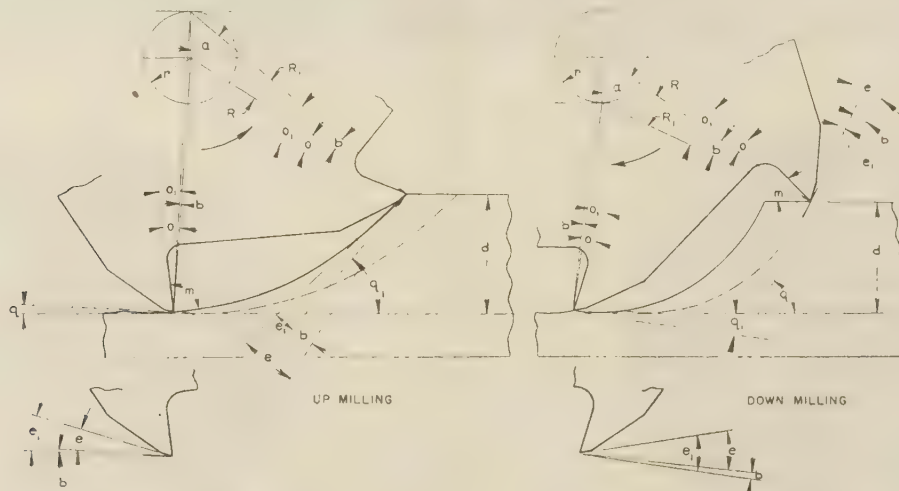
ANGLE OF APPROACH, RAKE AND CLEARANCE ANGLES IN UP MILLING AND DOWN MILLING
